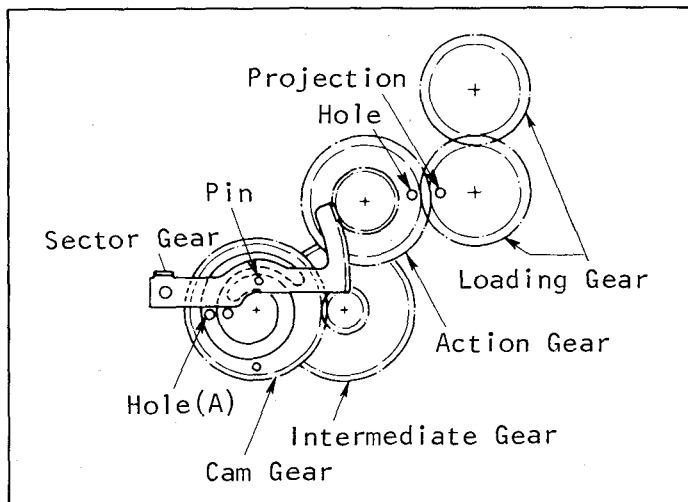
Adjustment of Cam Gear and Mode Select Switch - (5)
